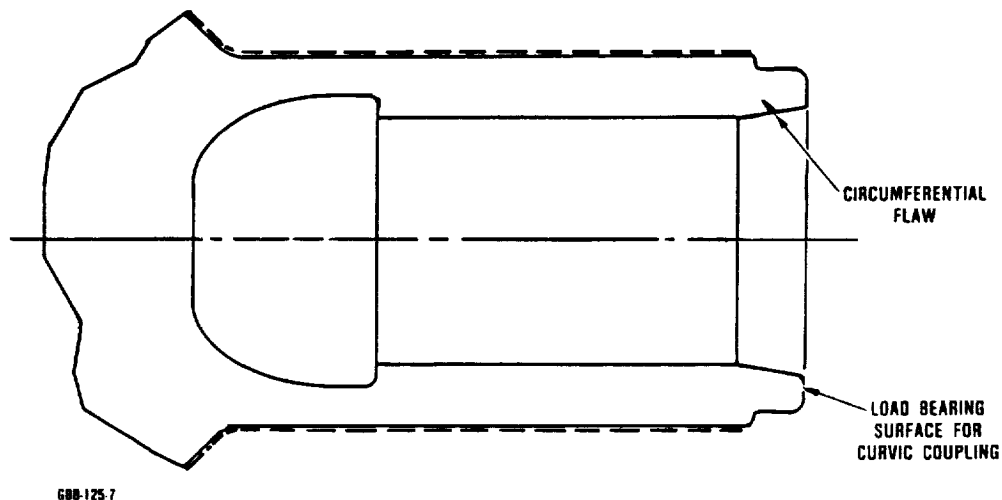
Flaw Revealed in Curvic Load Bearing Surface of Hollow Shaft Rotor.
